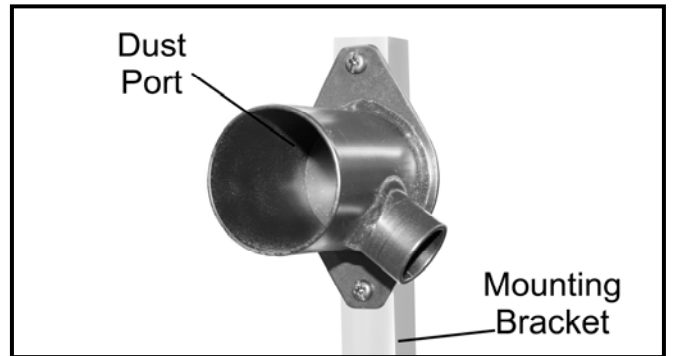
Installing the dust port to the bracket (when using the machine with the enclosure)
